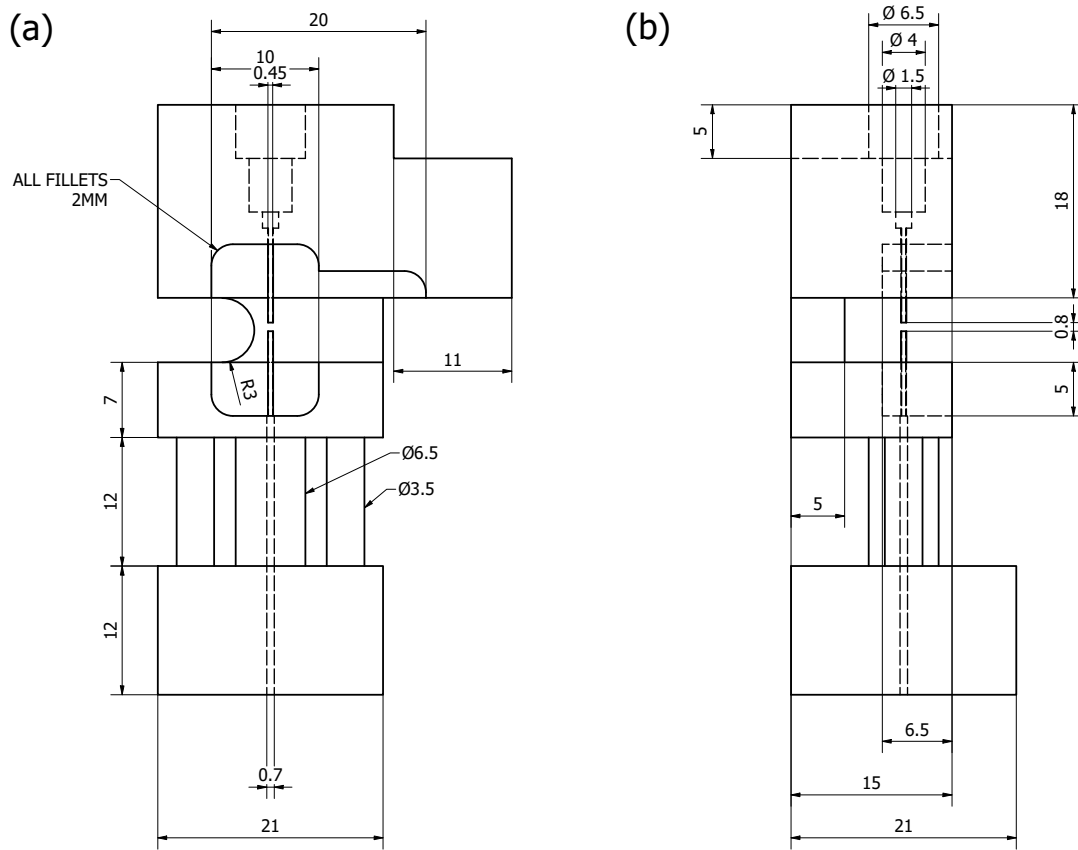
Technical drawing of the main housing (Figure 5.5 (d)) of the wire print head with all of the dimensions for (a) the front view and (b) the side view. It should be noted that all dimensions are in mm.
